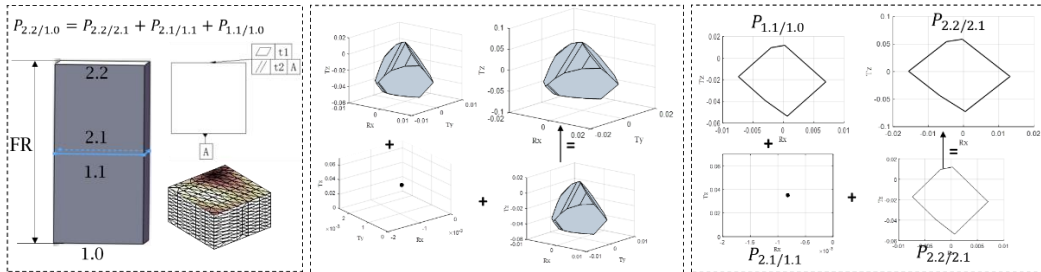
Example assembly. (a) Detailed drawing of assembly, (b) Assembly graph and operand polytopes in 3D, and (c) operand polytopes in 2D.
